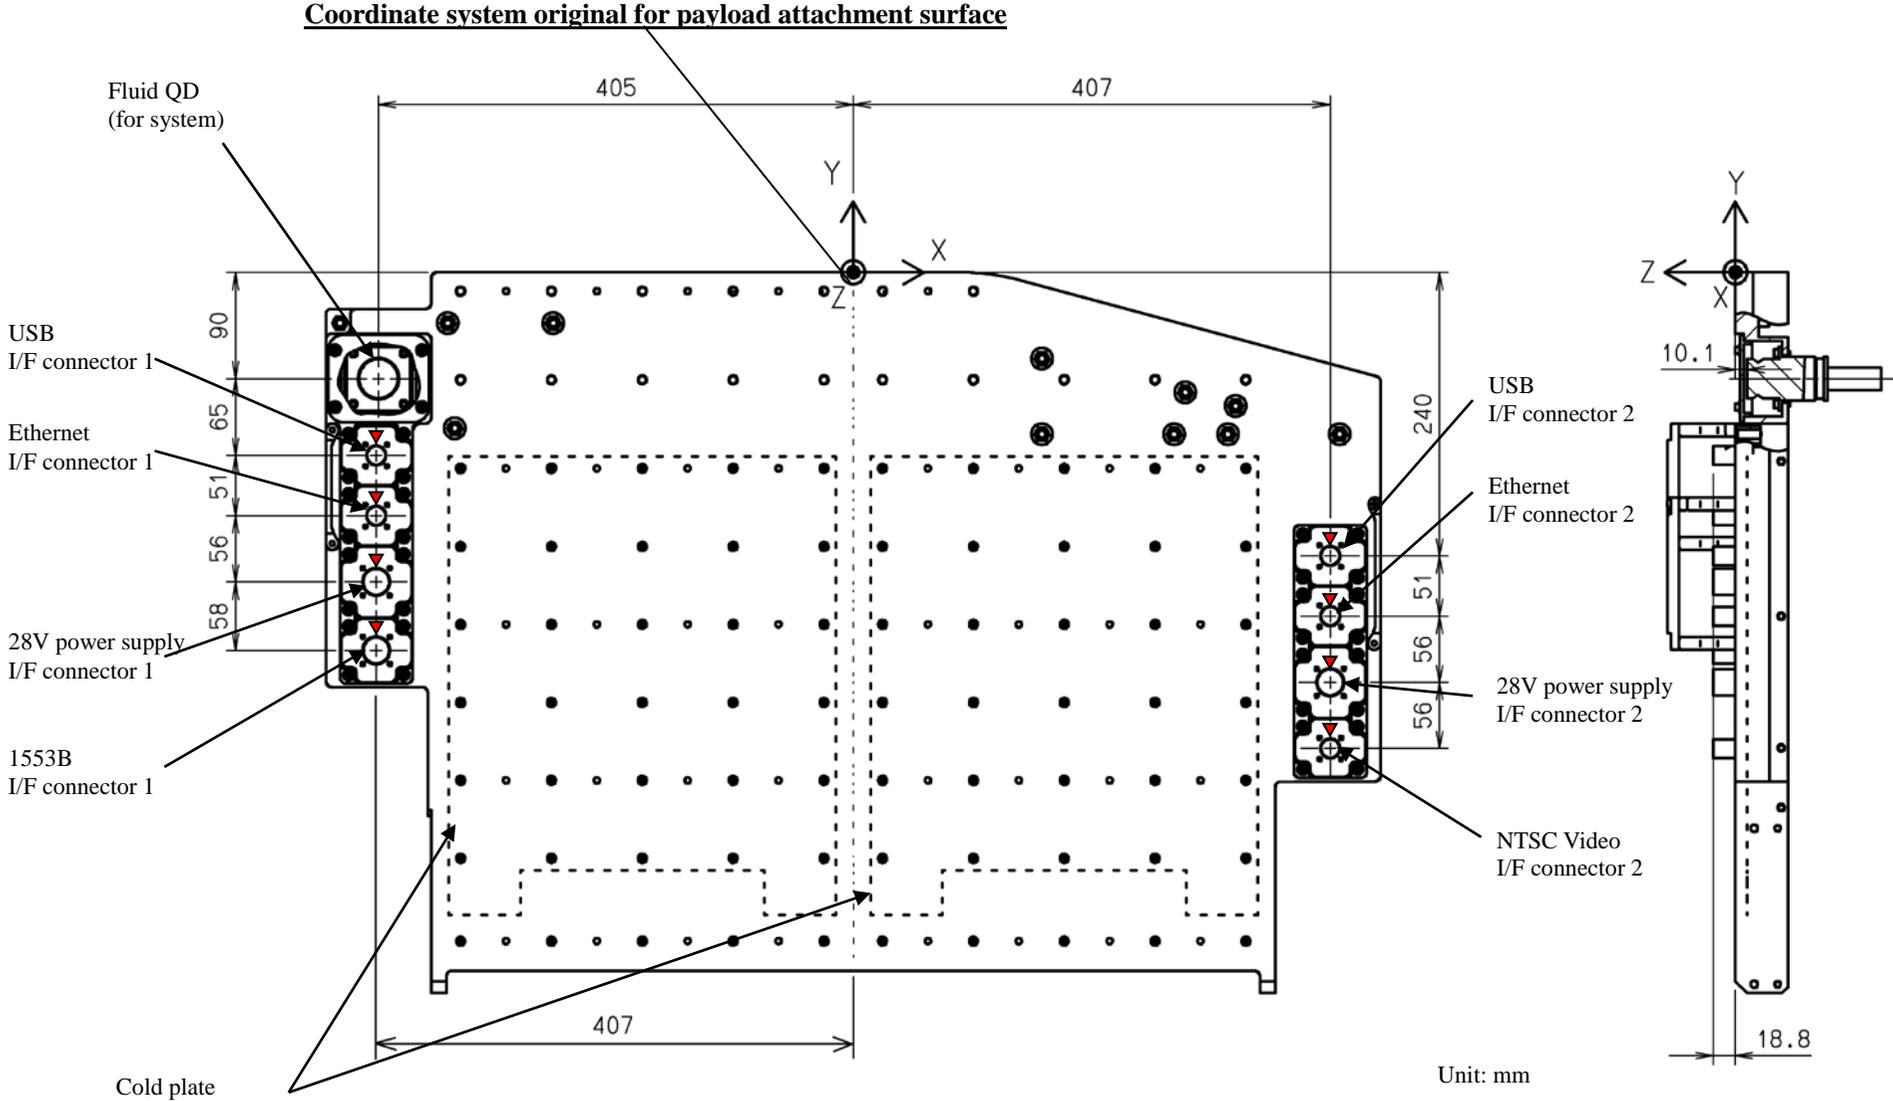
(2/2): Payload attachment surface, alignment of attachment screw holes, and connector locations
